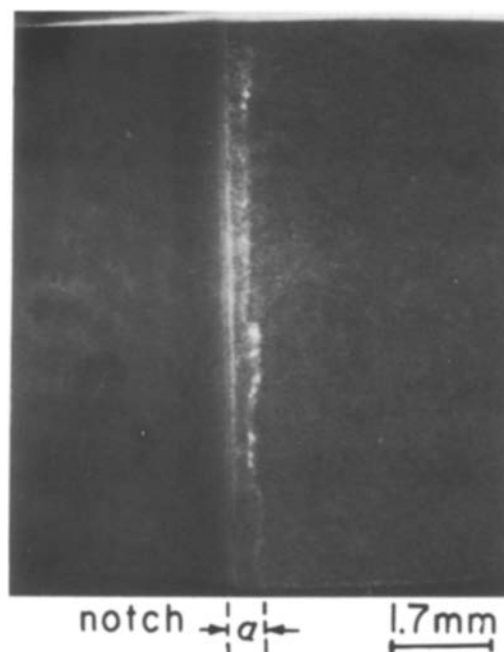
A straight, through-thickness Mode I fatigue pre-crack in the Type A specimen.
